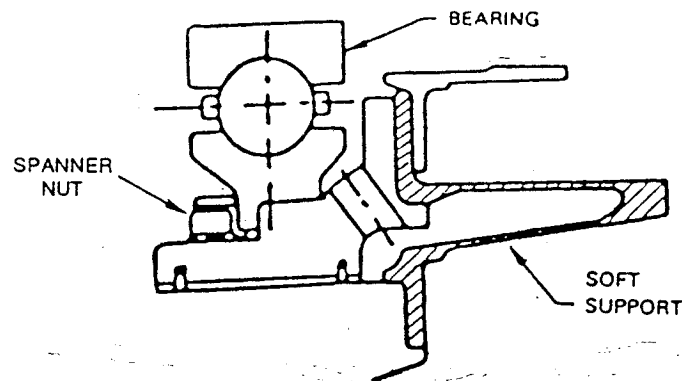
Selected Damper Spring Design for No. 3 Bearing
